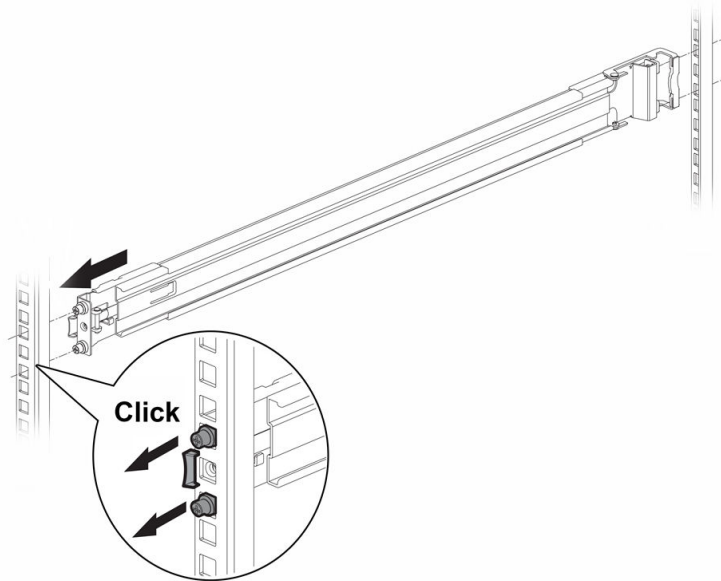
Attaching the Slider Assembly to the Front Rack Post
